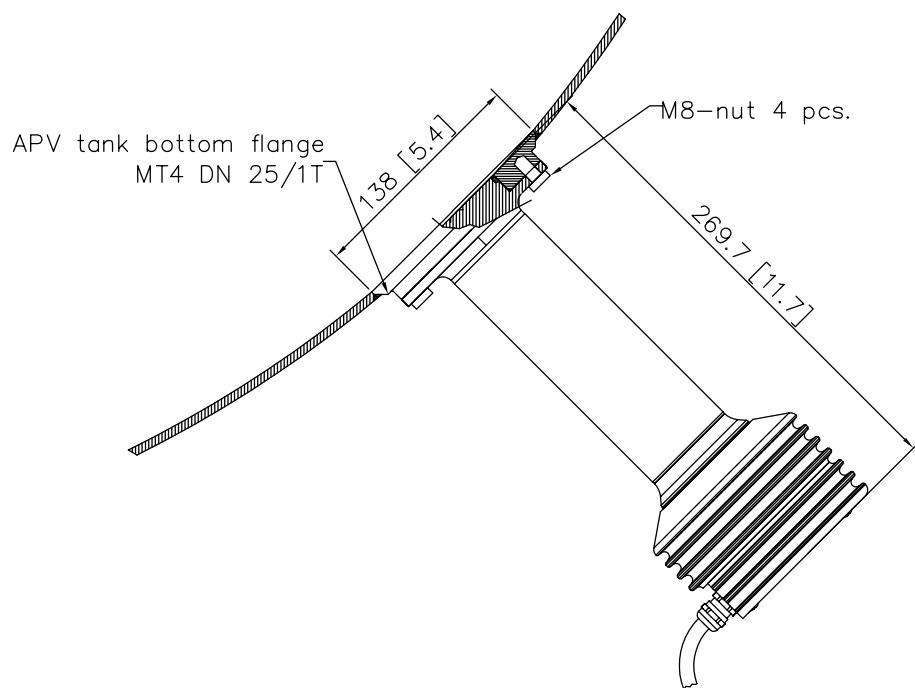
Flush mounting Probe refractometer PR-23-AP62-PSS
